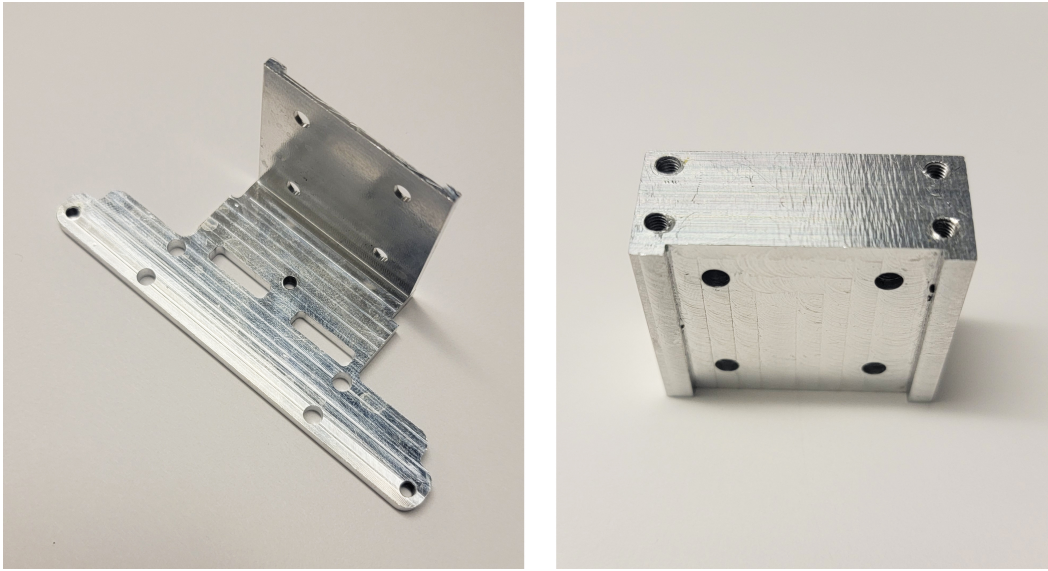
Detail of milled Z-axis carriages These parts hold a cantilevered baseplate at a right angle to the carriage block of the linear actuator used for Z-axis positioning. Left: minimal carriage, designed for supporting a single-camera device. Right: Version of carriage designed to support the baseplate of a 24 well device. A pocket on the mounting surface provides alignment to the carriage block.
